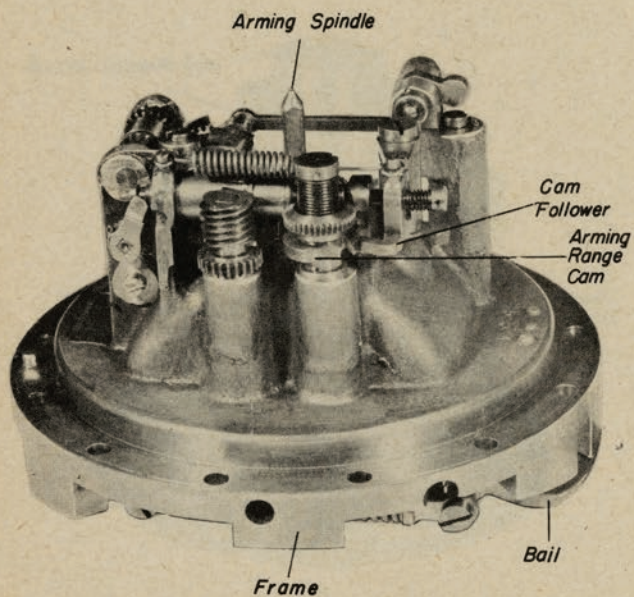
Exploder Type 2 Arming Assembly, Right Side
